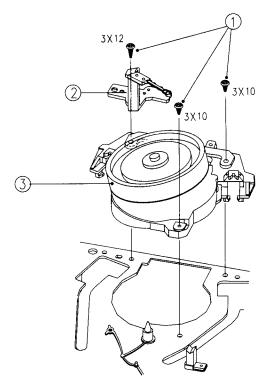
DRUM TOTAL ASS'Y & EARTH BRKT ASS'Y REMOVAL
